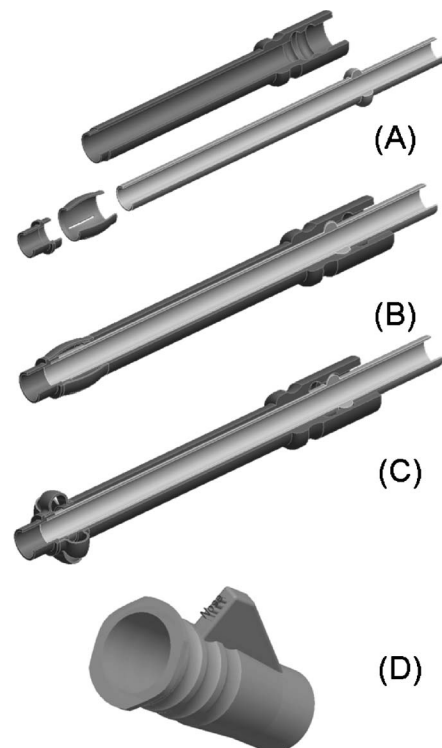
(a) Inner sock restraint system expansion system exploded view of components, (b) system assembled sock closed, (c) system assembled sock open, restraint system engaged, and (d) part F direction indicator
